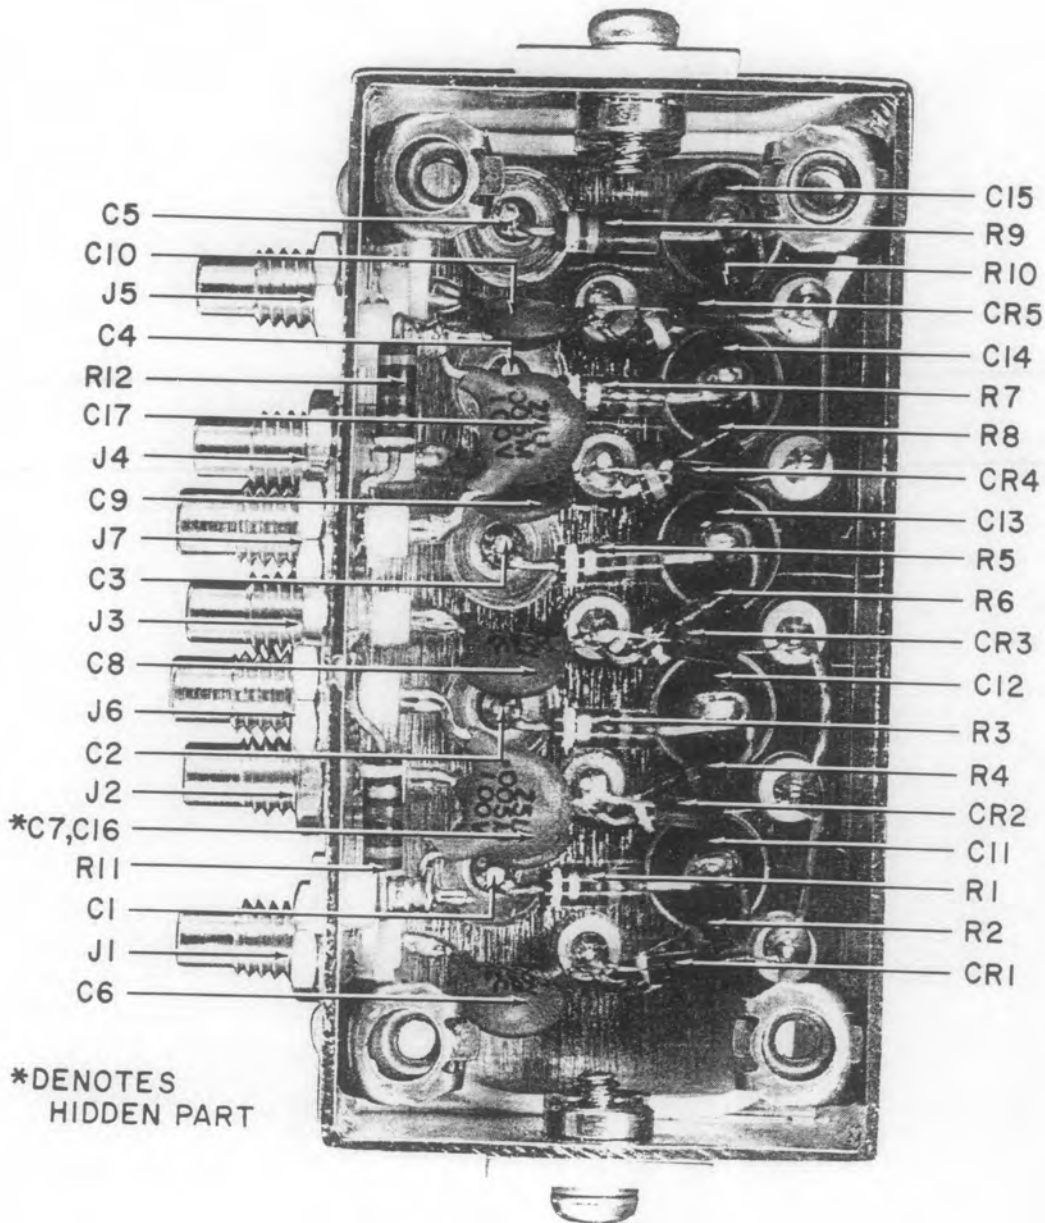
Type 7246-1 IF Switching Assembly (A8),
